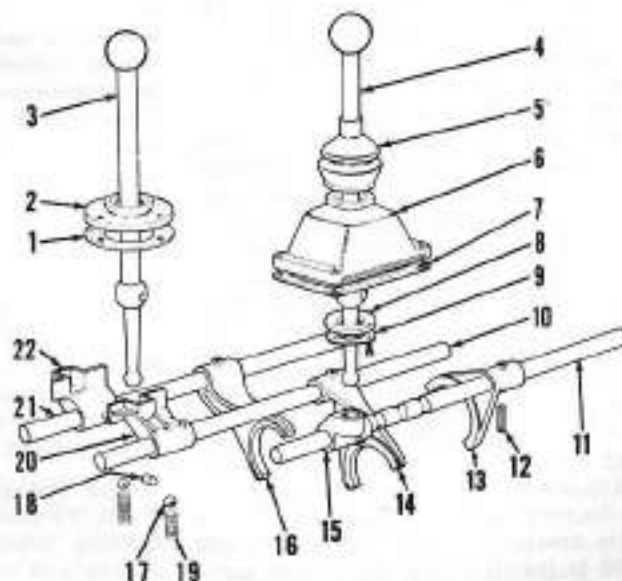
Exploded view of shift lever assemblies, shift rails and forks for models 780, 880, 990, 3800 and 4600. Creeper shift lever (1) engages shift fork (31)—Fig. 108) on 12-speed models and is not used on six-speed transmissions.
